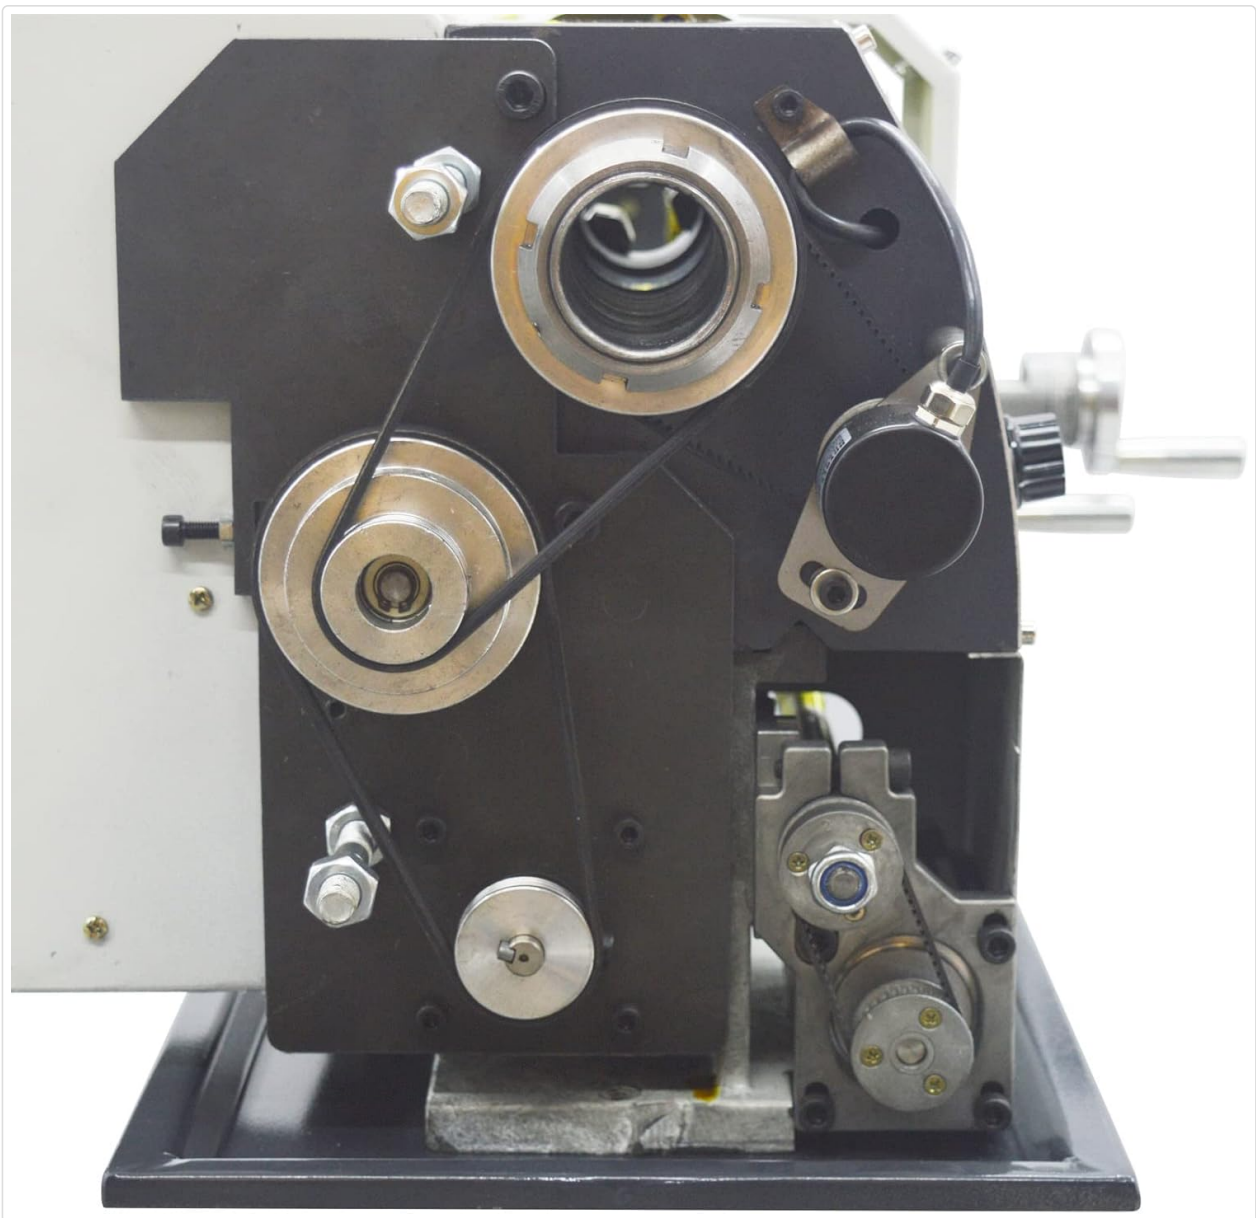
View of the internal belt drive system, showing the motor, pulleys, and belts. Regular inspection of these components is essential for proper machine function.
